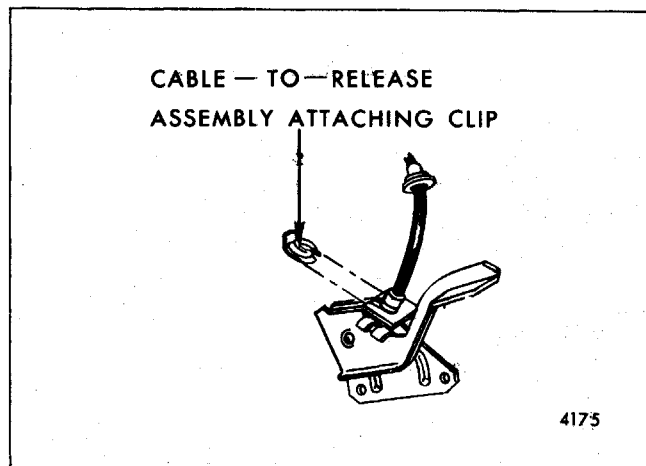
Hood Latch Cable-to-Release Handle Attachment - "H" Body (Less "07,27" Style)
